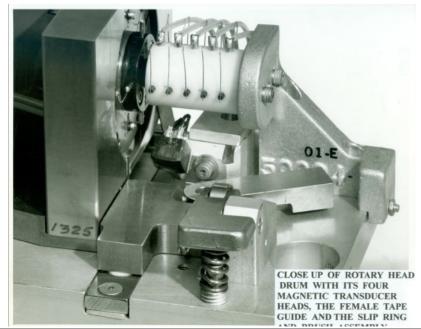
Top view of the removable video head assembly, including motor, video head drum, and four magnetic head transducers
